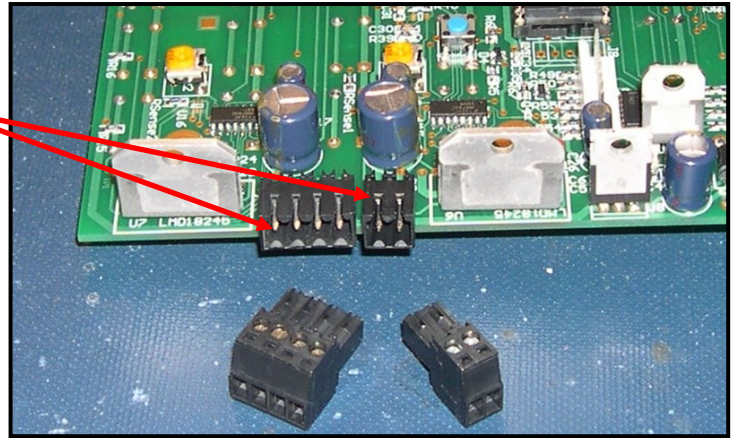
PCB Connector Kit Soldered directly onto the PCB.
